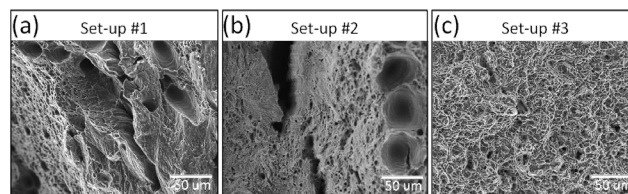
Representative fracture surface after tensile test in 6008-T7 welds produced in the welding configuration (a) set-up #1, (b) set-up #2 and (c) set-up #3.
